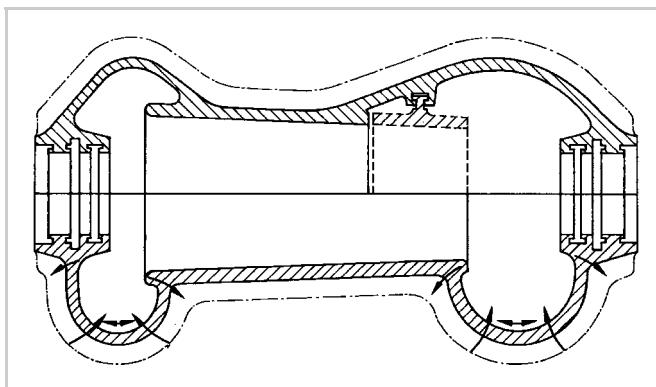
Axially divided turbine housing, after [7.224]: lower half conventional; upper half with separate blade carrier
